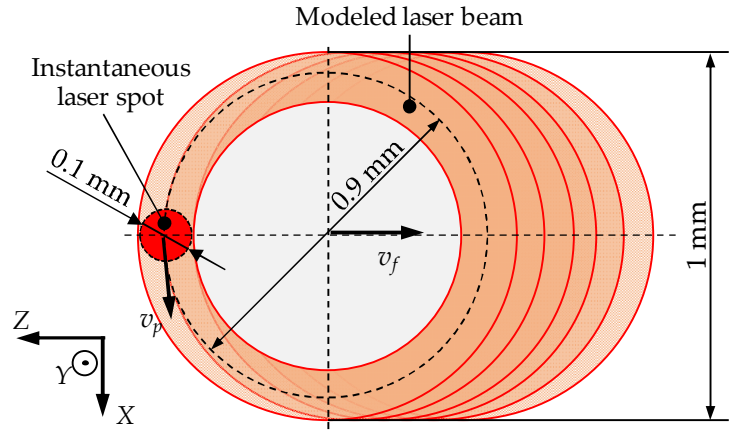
Wobble scanning technique employed for the welding operation
